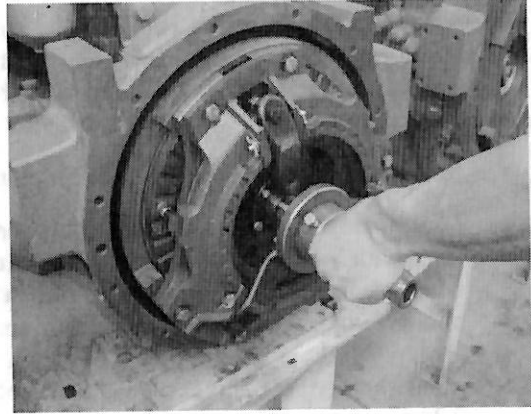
Adjustment and installment of clutch during the tractor overhauling
